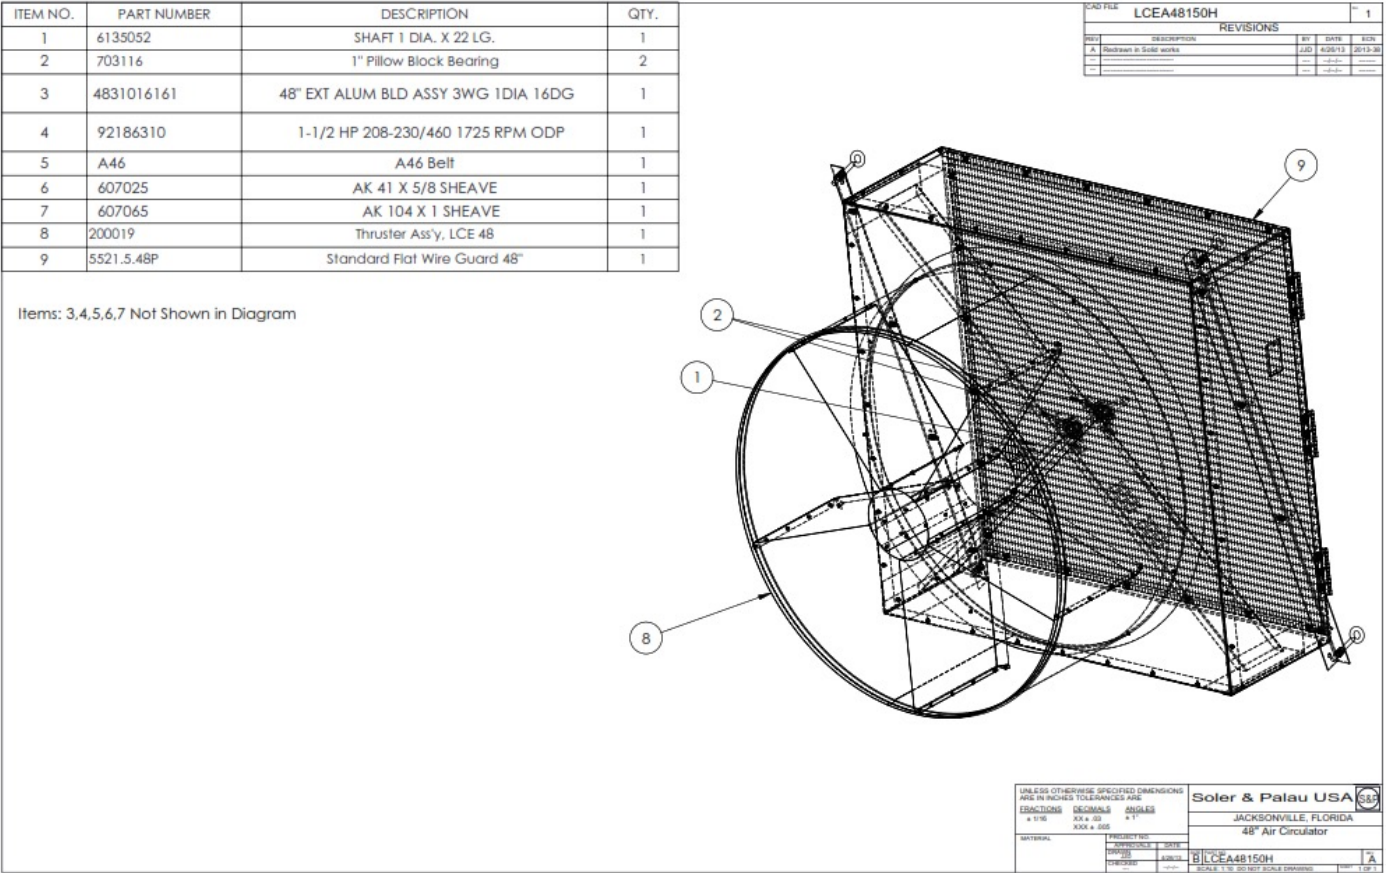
CrewCooler exploded-view parts diagram (displayed above).
